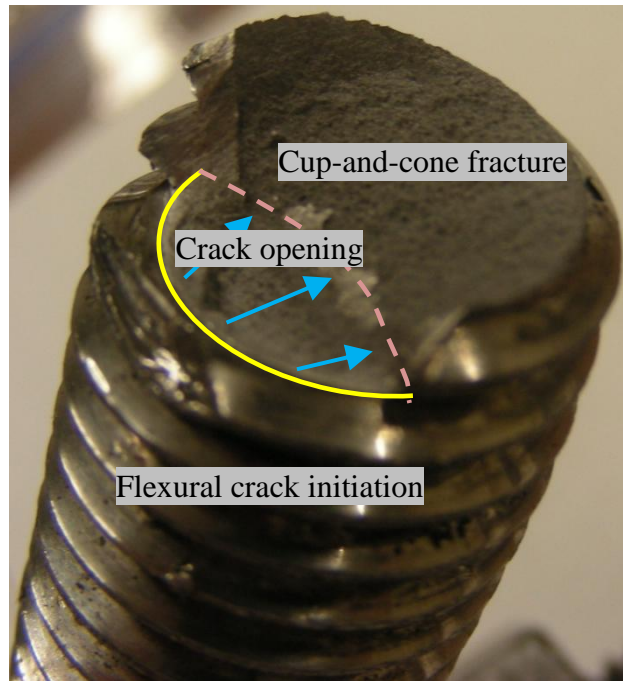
fracture surfaces of A304-2da-RL
